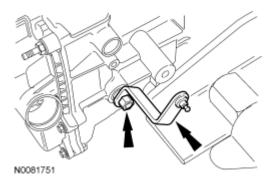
Locating dowel pin from torque converter housing Courtesy of FORD MOTOR CO.
